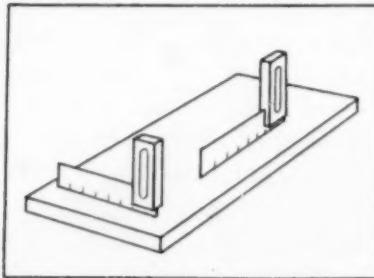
TESTING THE BROAD SURFACE OF A BOARD WITH A TRY SQUARE.
